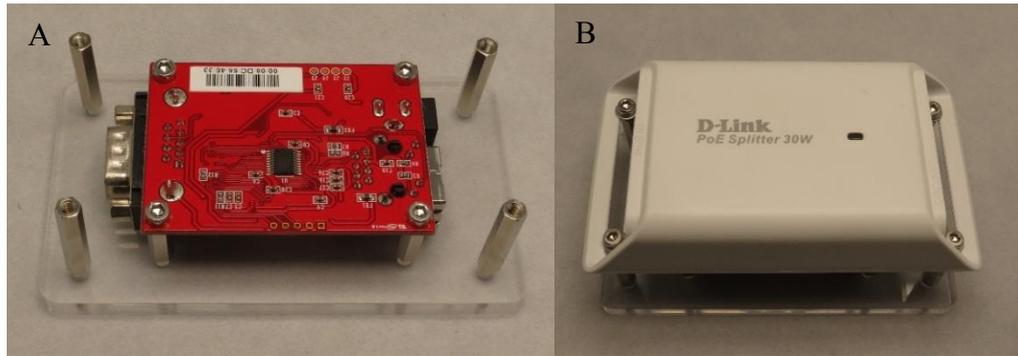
(A) 25 mm PCB spacers were screwed in the remaining four holes and (B) the PoE splitter was mounted.
